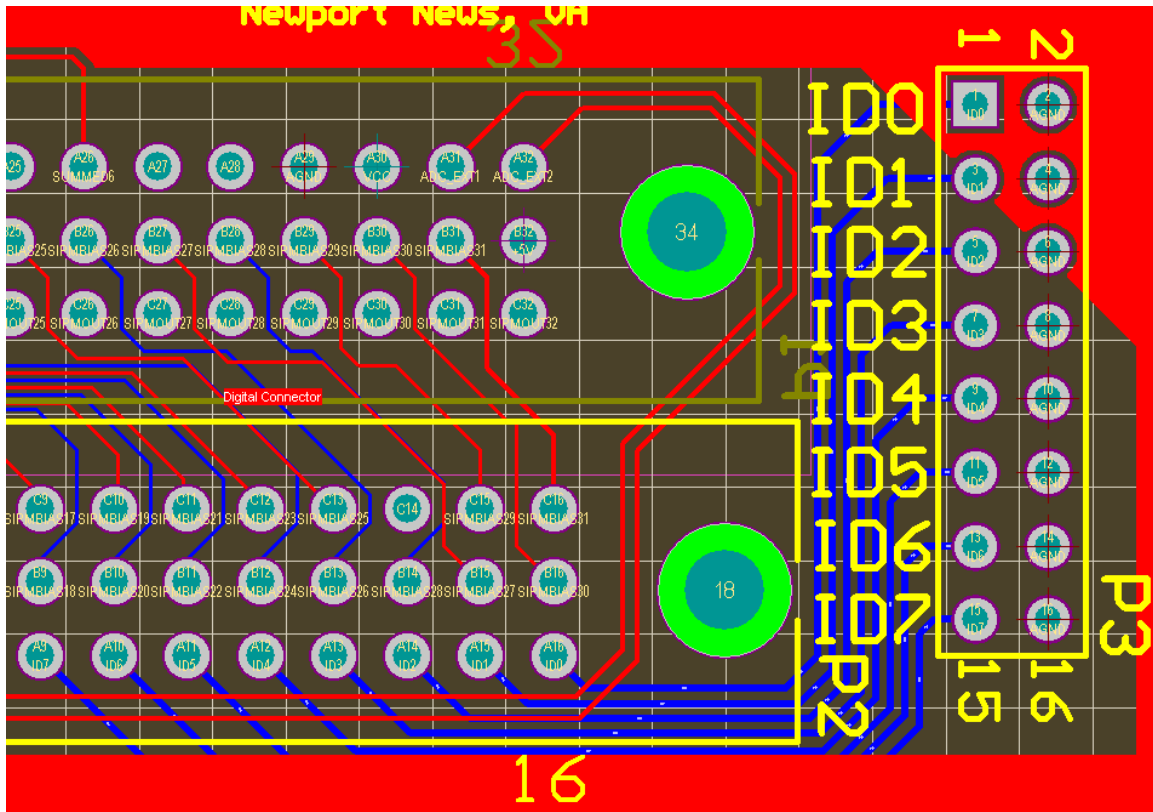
Close-Up CAD drawing of the location ID bus on the backplane
